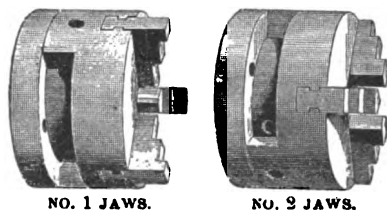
HARTFORD LEVER SCROLL CHUCKS
